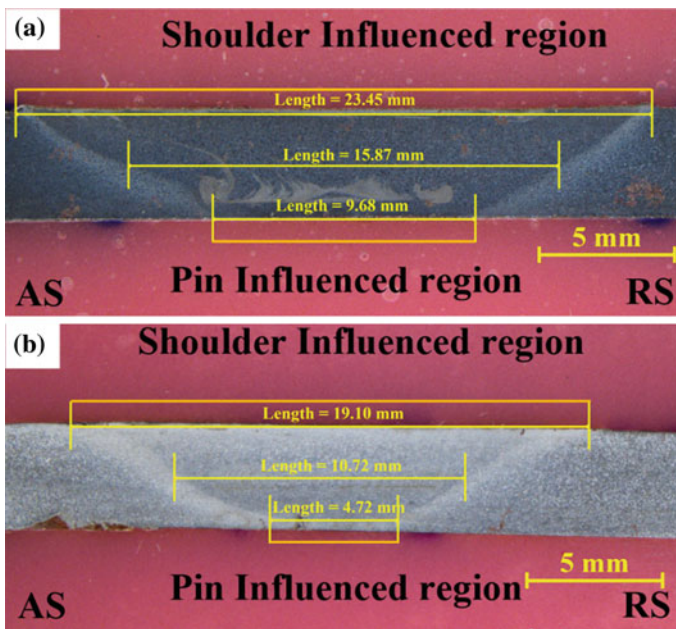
Macroscopic view of weld 1 and weld 2
